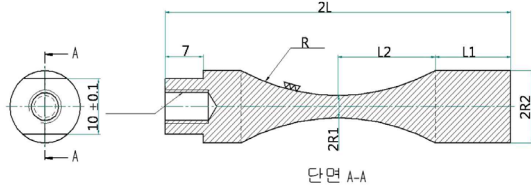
Geometry and dimensions of ultrasonic fatigue test specimen
